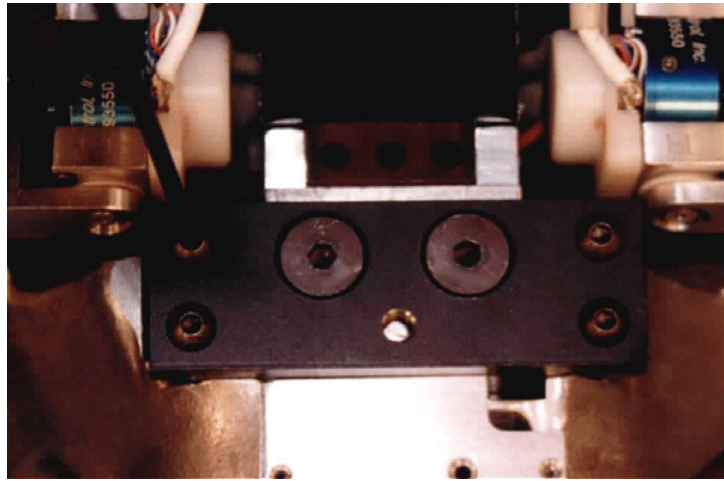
Lower Abdomen to Rear Attachment Plate
